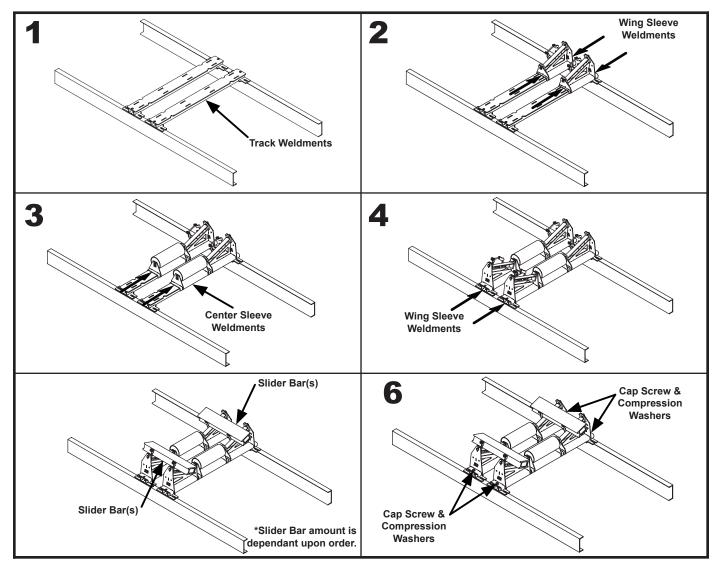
Installing Slider Cradle (Single-Bar Shown)
